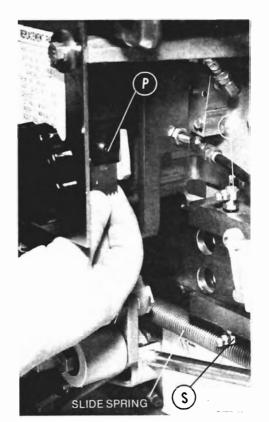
BLADE REPLACEMENT RIGHT SIDE VIEW
